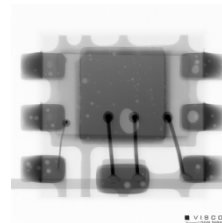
DFN2020-6 (SOT1118) – Component D263 without wettable side pads
